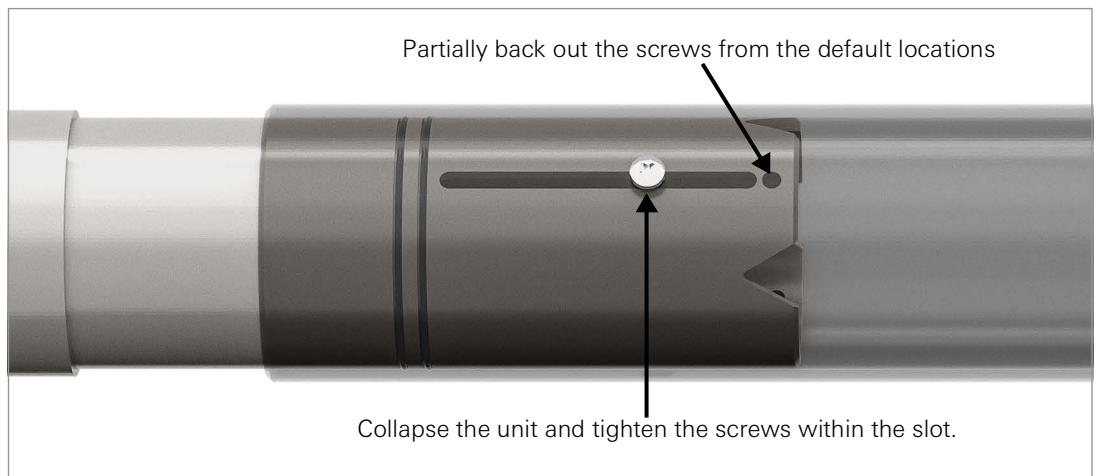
Back out Screws and Re-Install into the Slot Location
